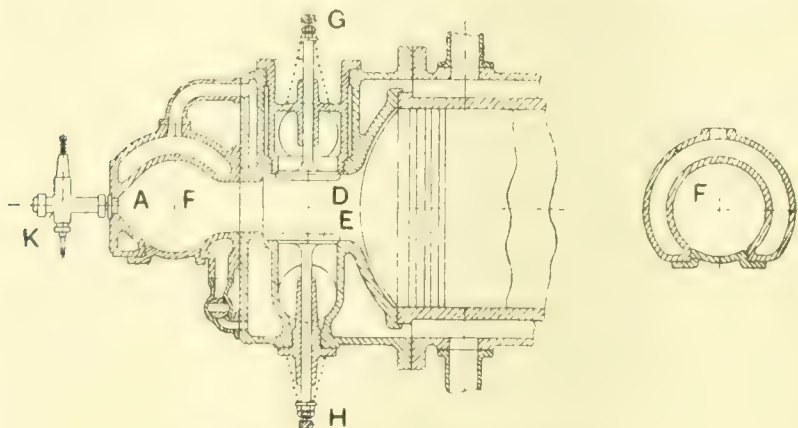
IMPROVED DESIGN OF OIL ENGINE.
